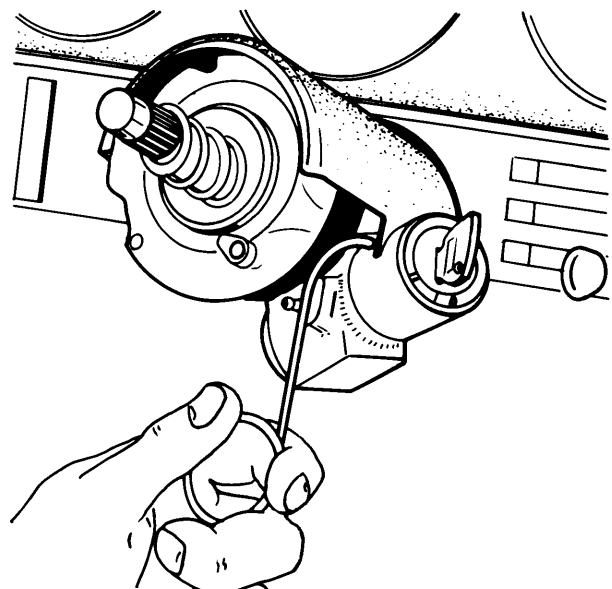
Using a Fabricated Tool to Remove Ignition Lock Switch
